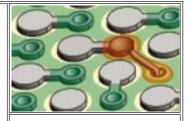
Sample of drill system used to cut the connection from the BGA pad to the via.
